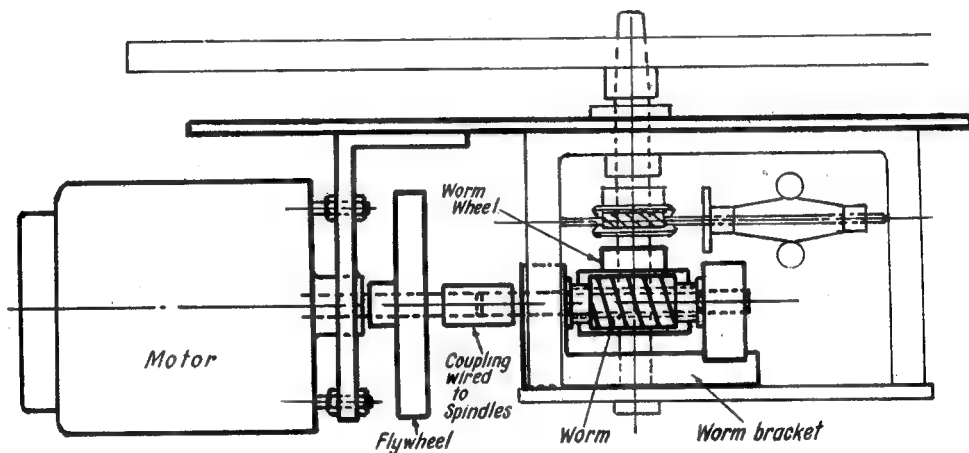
Arrangement of electric drive. New parts outlined in heavy lines, original parts in light lines
